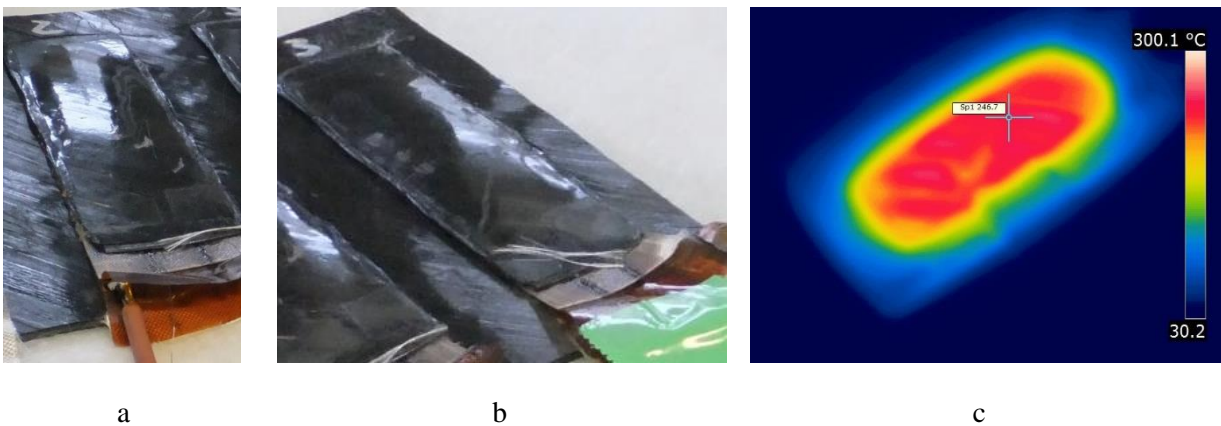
Picture of test specimen 2 (a) and test specimen 3 (b) after separation test. Exemplary thermographic image of disassembly coupon (c)
